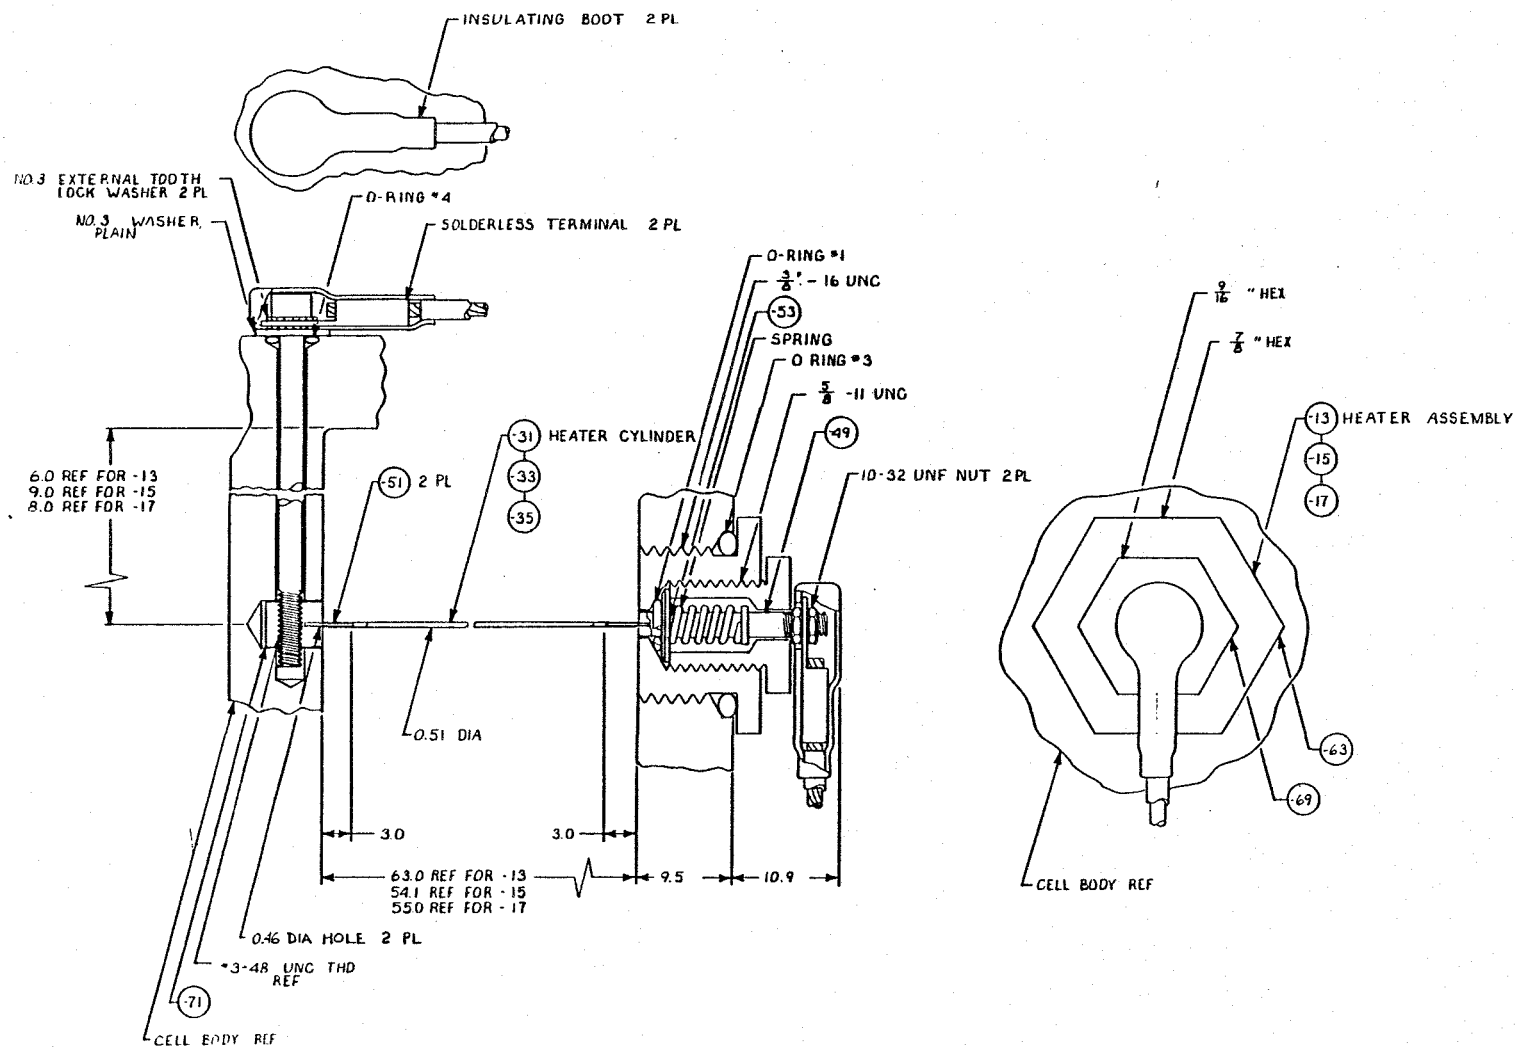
0.51 mm DIAMETER HEATER DESIGN
